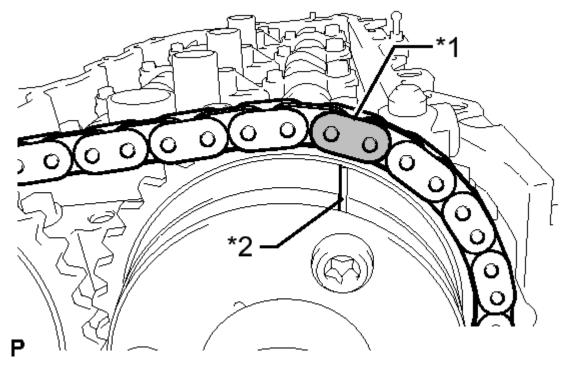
Aligning Timing Chain Mark Plate (Yellow) & Timing Exhaust Gear Mark
